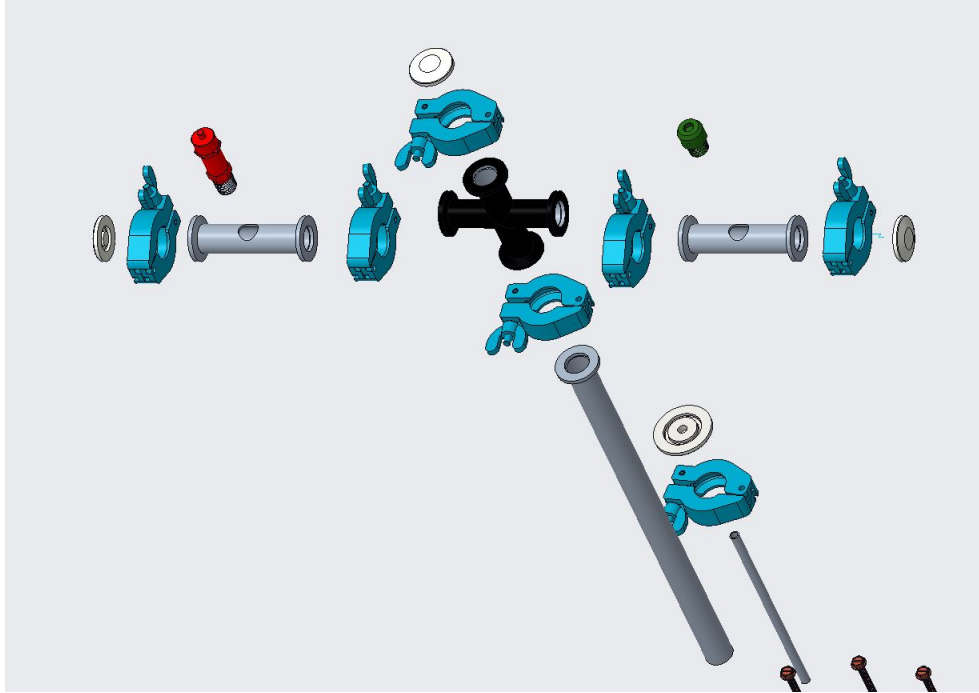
Exploded view, Zoom of Upper Pipe Assembly
